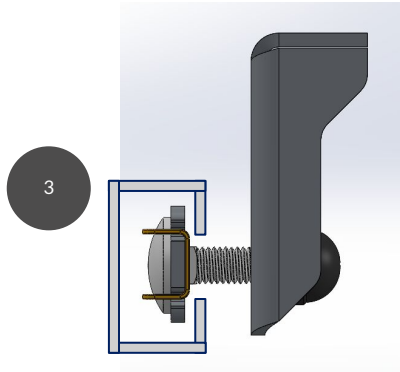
Fit bottom brackets over nut plate assemblies in tundra rails
